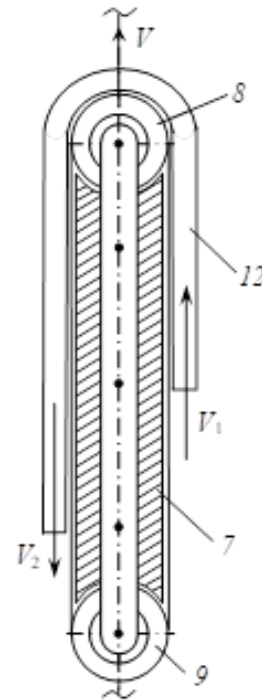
Composite base plate 7 – base plate, 8 – upper roller, 9 – lower roller, 12 – sheet material
